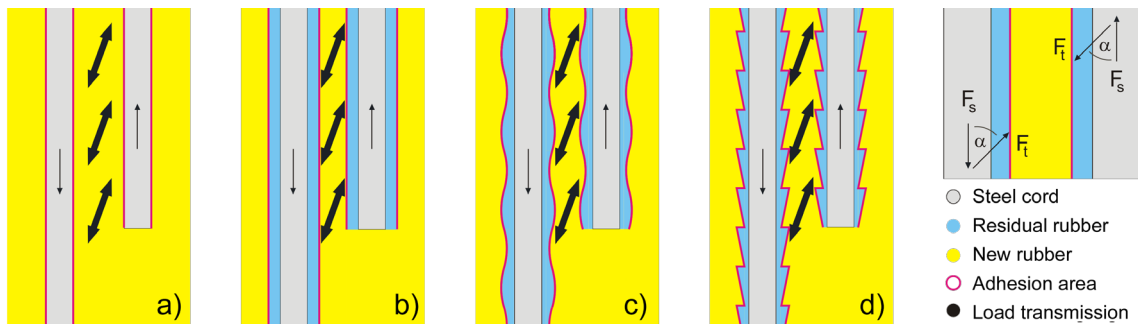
Schematic splice illustration for different splicing preparation layouts for steel cord conveyor belts; a) complete stripping of the cords, b) remaining residual rubber layer with defined thickness and c) and d) systematic texturing of the residual rubber layer
